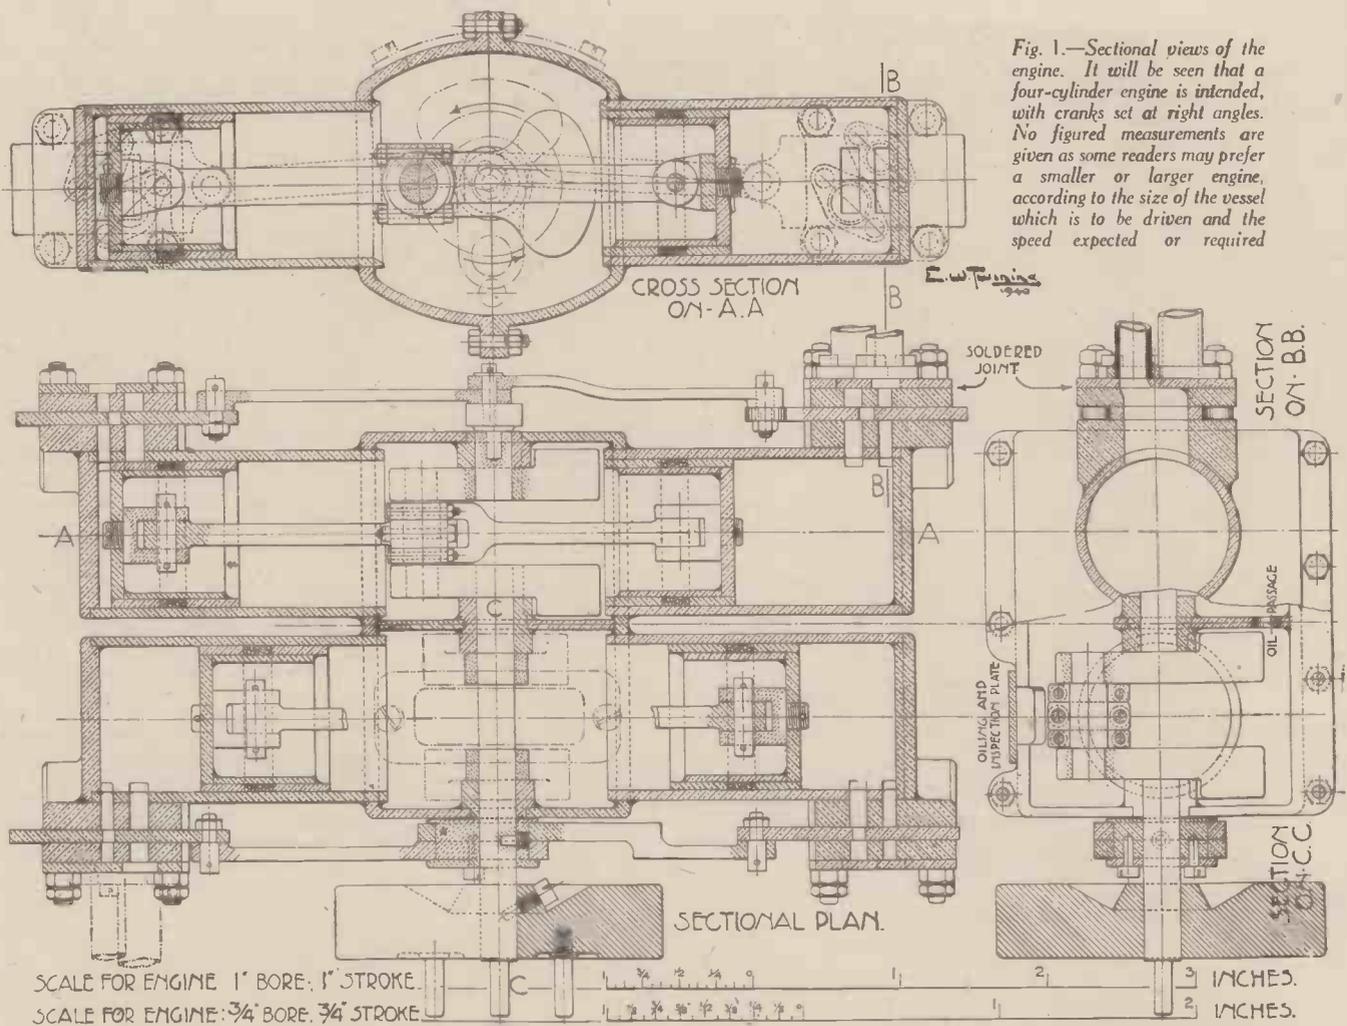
Sectional views of the engine. It will be seen that a four-cylinder engine is intended, with cranks set at right angles. No figured measurements are given as some readers may prefer a smaller or larger engine, according to the size of the vessel which is to be driven and the speed expected or required.
